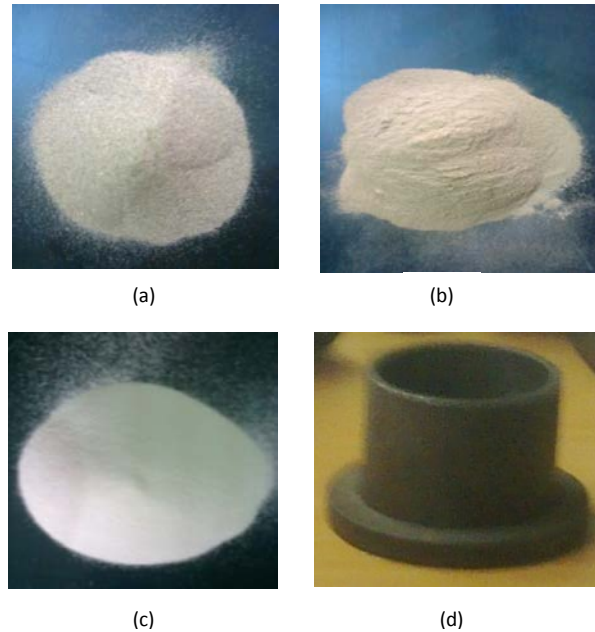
Pre-treated materials and fabricated mould: (a) clay sample, (b) silica sand, (c) alumina and (d) stainless steel mould with detachable base
